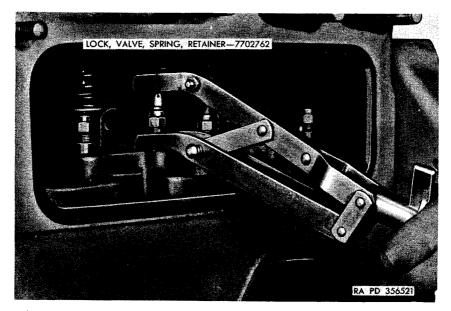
Removing valve spring retainer lock with valve lifter-41-L-1410.
